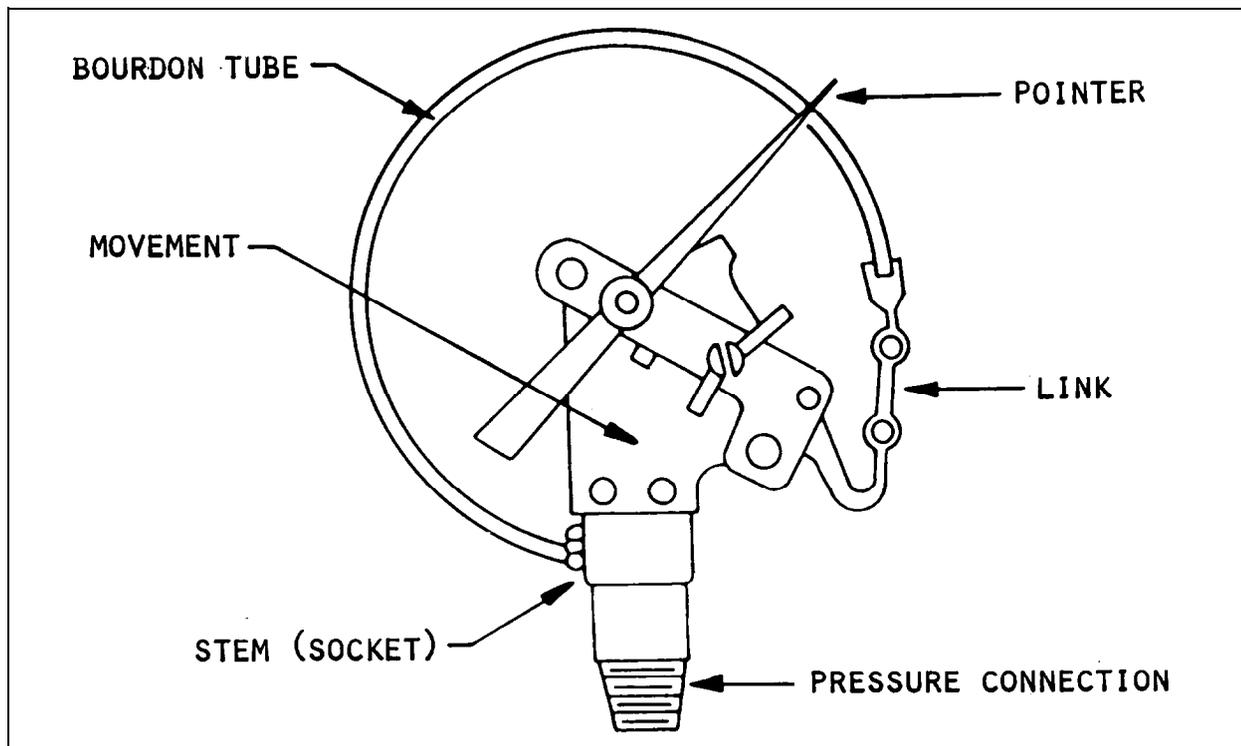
Internal Mechanism of a Bourdon Type Pressure Gauge
